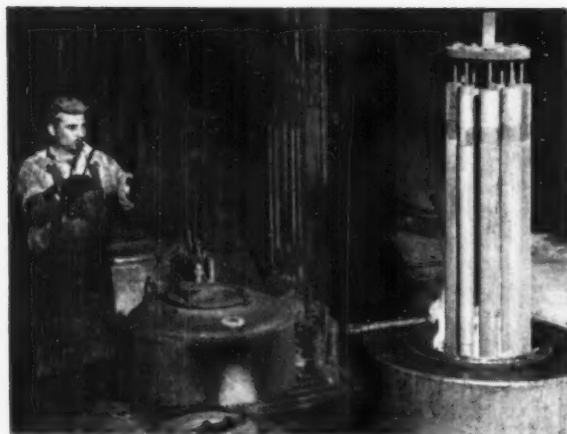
Jig of slush pump rods being quenched in tank of cooled, circulating oil, after being gas carburized in furnaces in back ground. A file-hard case is obtained.
